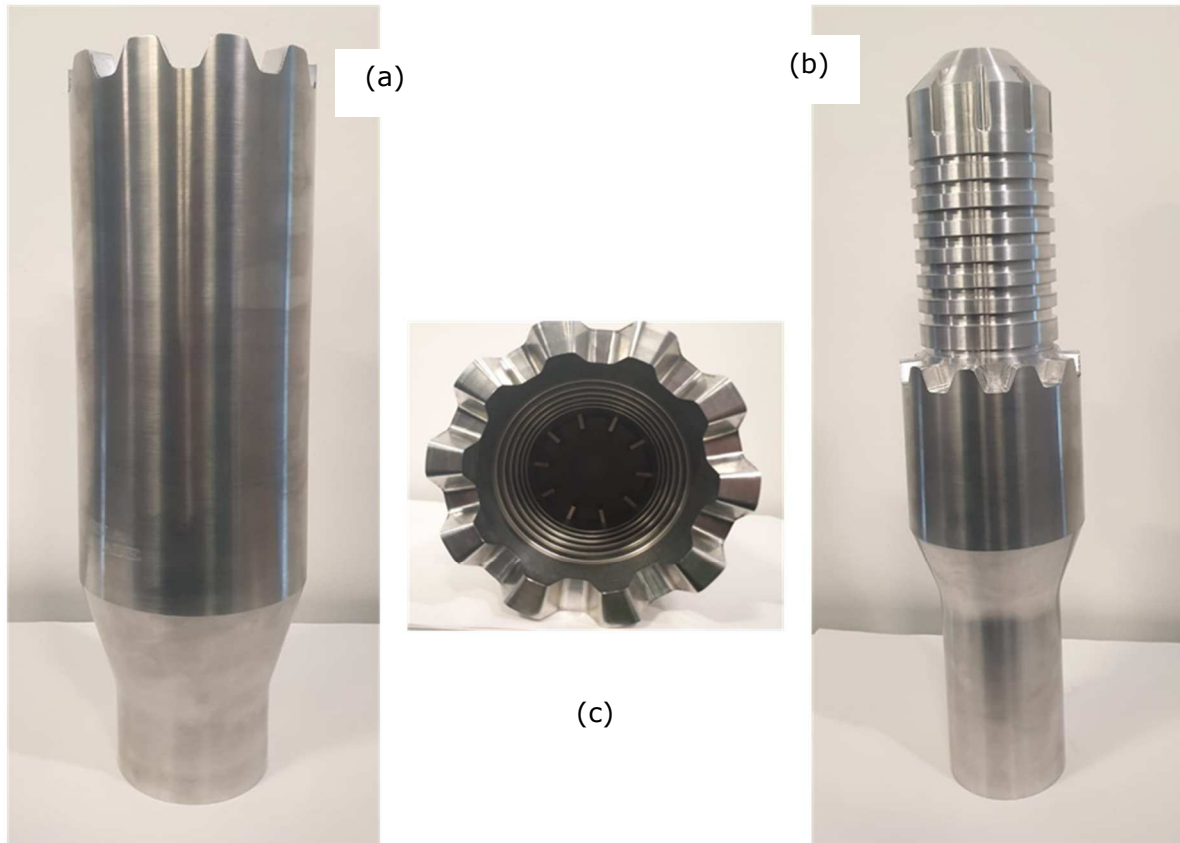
Completed CNC machined models of non-threaded tool joint (aluminium): (a) Box Connector, (b) Pin Connector, and (c) top view of Box Connector based on Snap-Latch Rings design (3D CAD model of Pin and Box Connector in Appendix B).
